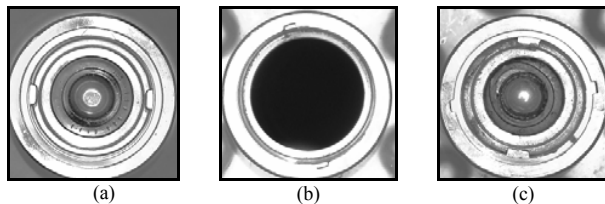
Variations in filler valve assembly. (a) Filler valve assembly in good order, (b) Neck spear missing from the filler valve assembly, and (c) Damaged filler valve seal.
